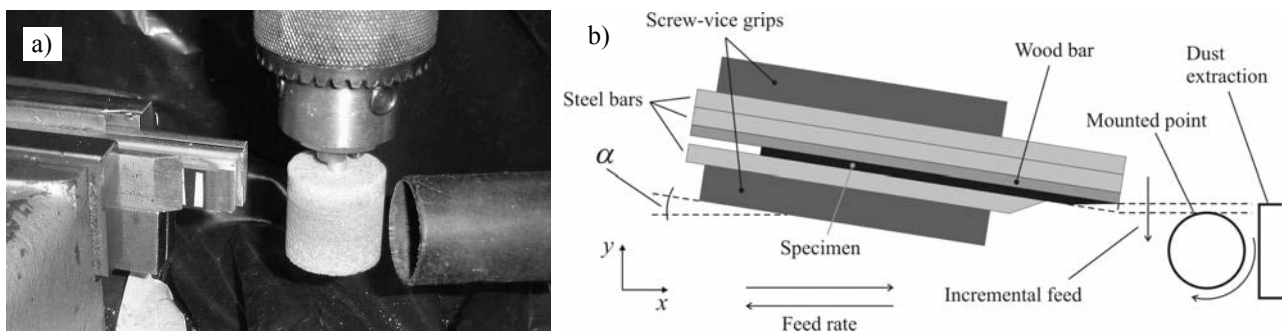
Grinding of a $\alpha=15^\circ$ angle in a milling machine (a) and scheme of the grinding process (b).
